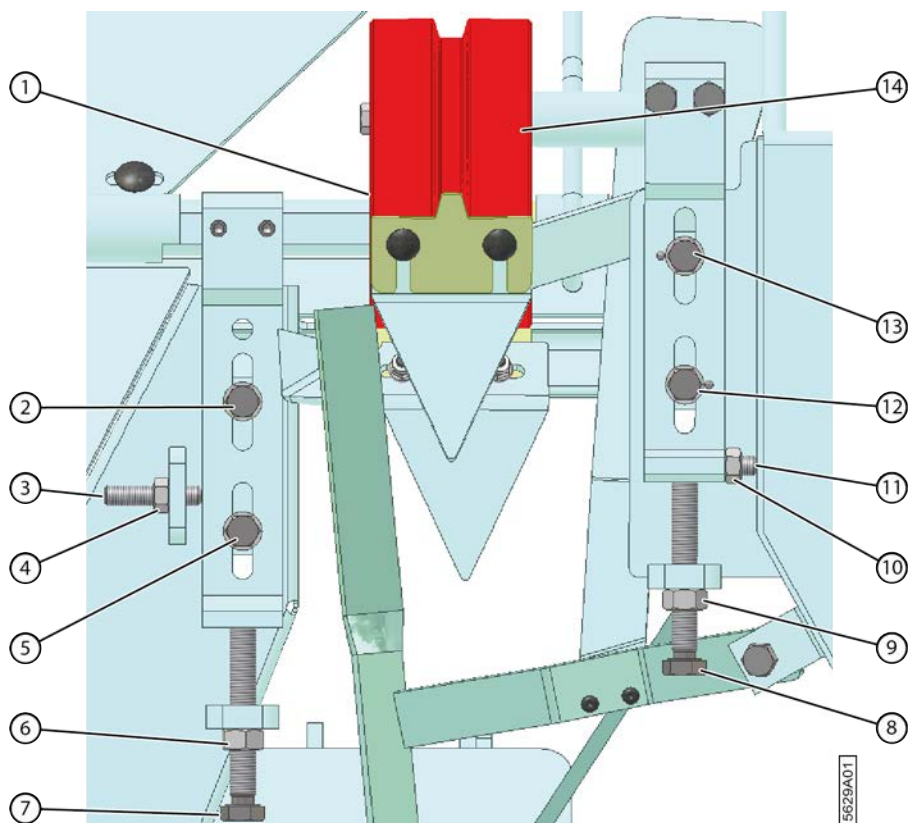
Adjusting the tension of the lowermost outermost picking belt
